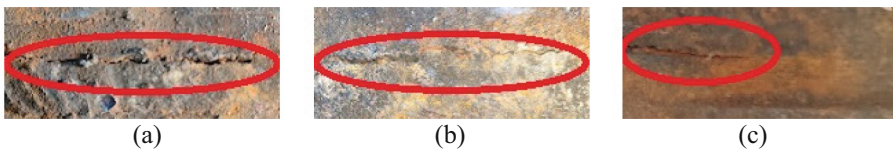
Cracking of the outer copper weld (top lance durability: (a) – 45; (b) – 62; (c) – 8 melts).
